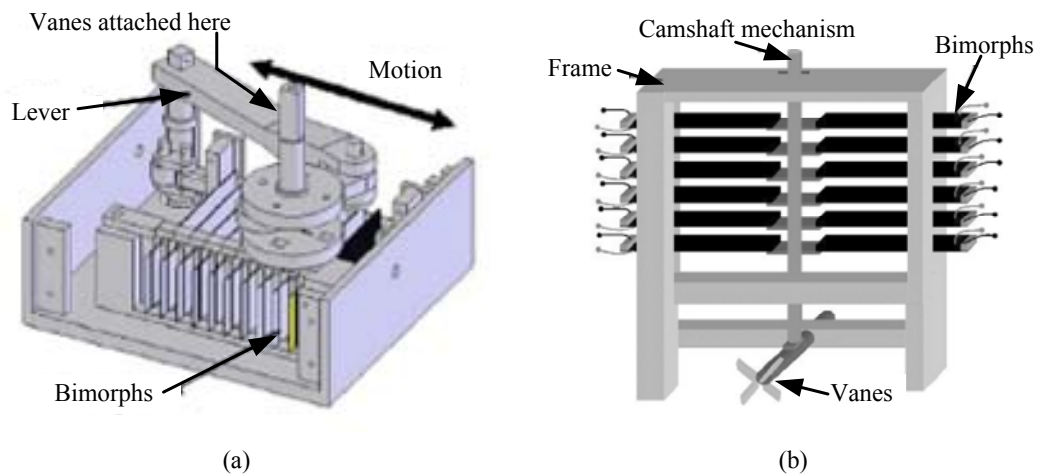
(a) Crankshaft design of a ‘Small scale windmill’ [40] (b) Camshaft design of an air-powered electric energy generator [32]
